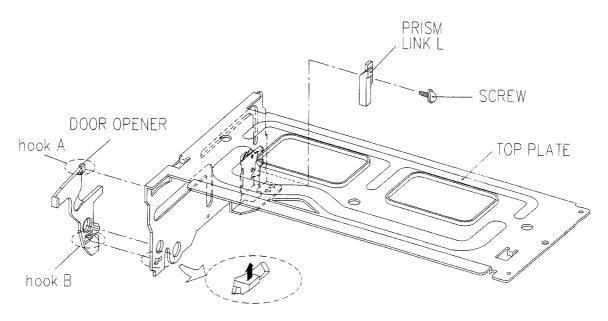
DISASSEMBLY OF THE TOP PLATE
